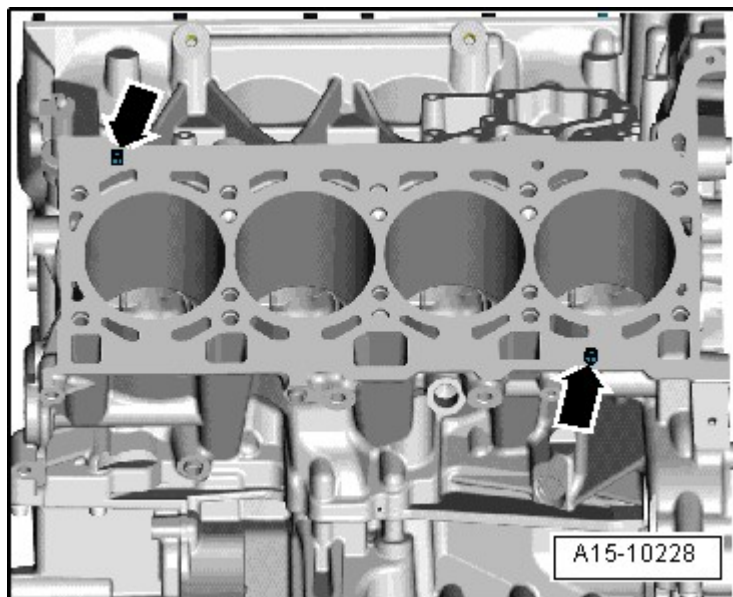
Identifying Alignment Bushings In Cylinder Block
